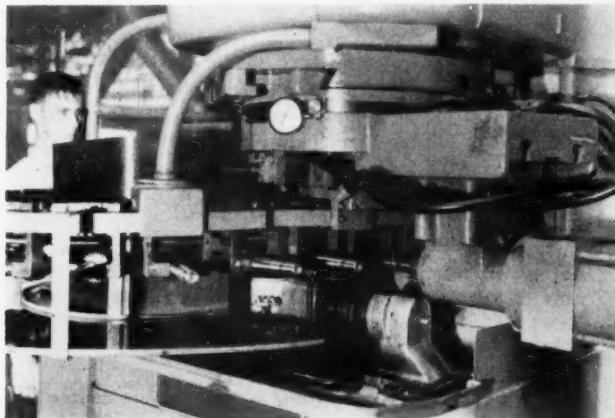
The teeth on the reverse "sun" gear are finished by shaving in this Michigan Tool underpass gear finisher.
